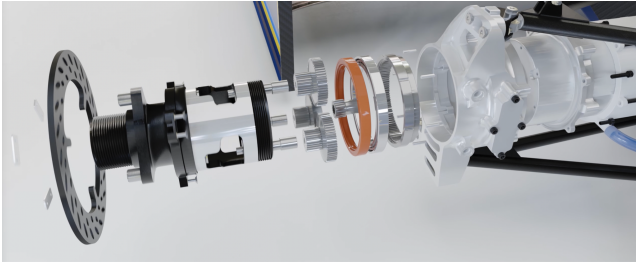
Exploded Render – R4X (MR23) Drive Unit
